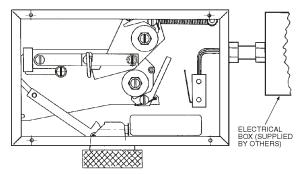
Miniature Switch Installation in Model MCH3 /NMCH3Control Head.
